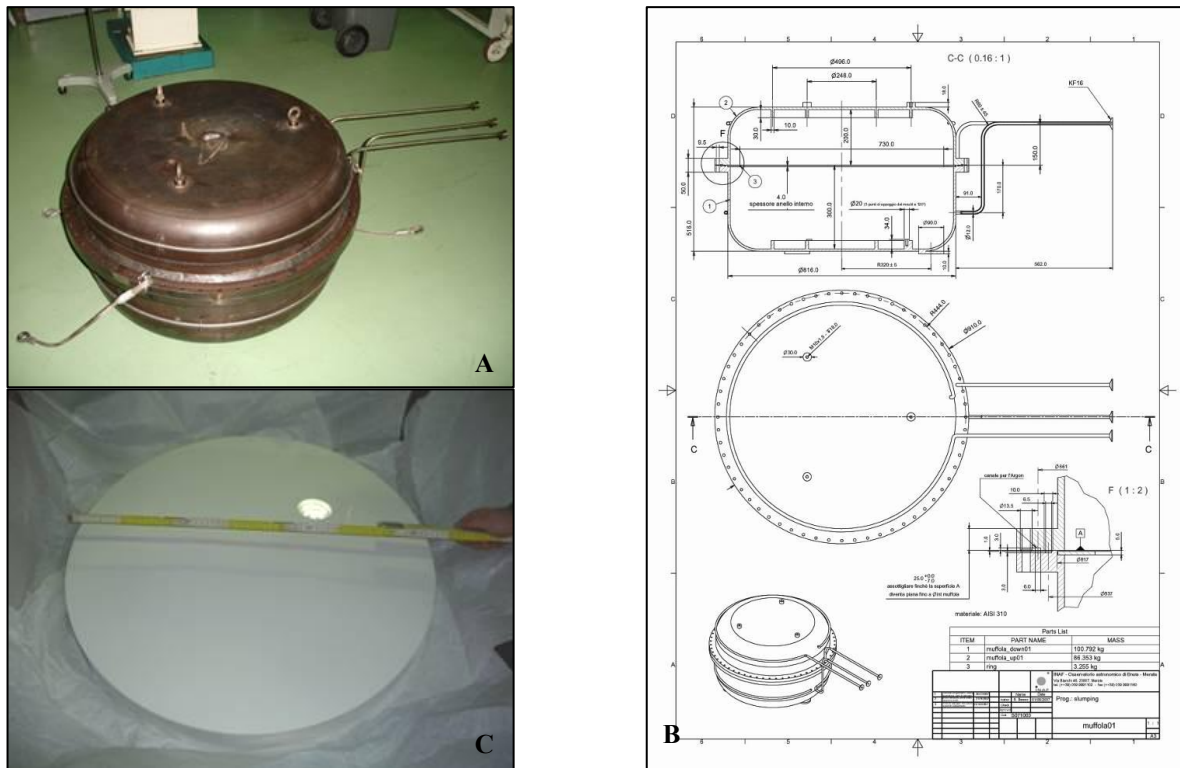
(A) Large muffle used for the full scale slumping. (B) Mechanical drawing of the large muffle. (C) 700 mm diameter ZERODUR K20 mould figured by SESO.
